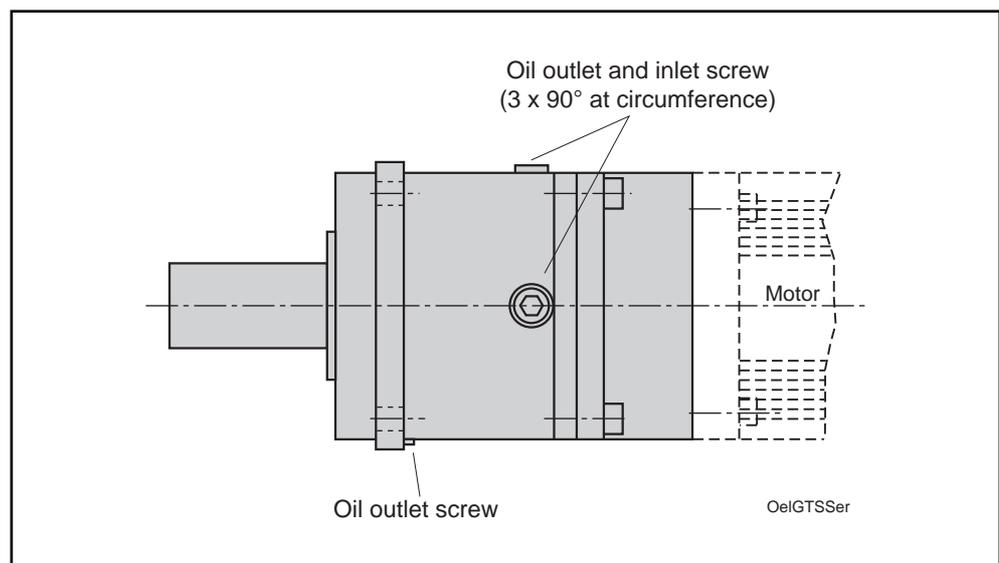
Position of the oil inlet and outlet screws on the GTS planetary gearbox
